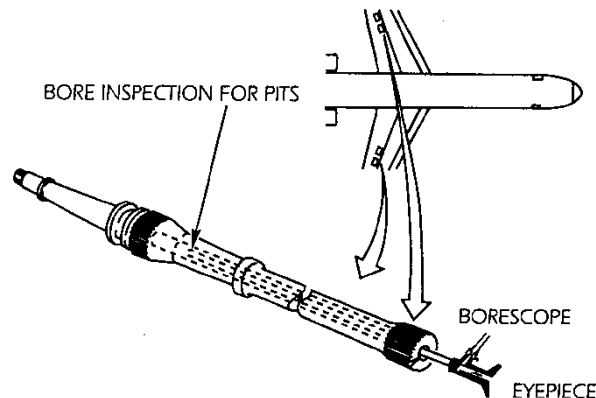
Borescope inspection of spoiler torsion bar.
